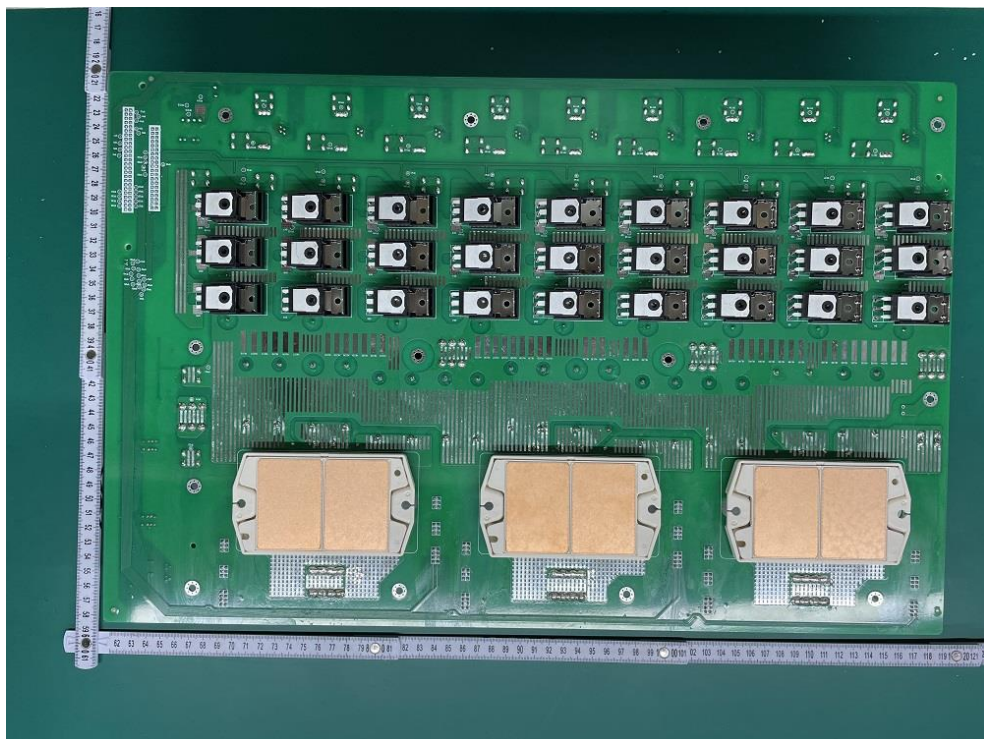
Back view of Main power board for C6-50K-T6-LV-40, C6-60K-T9-LV-40
